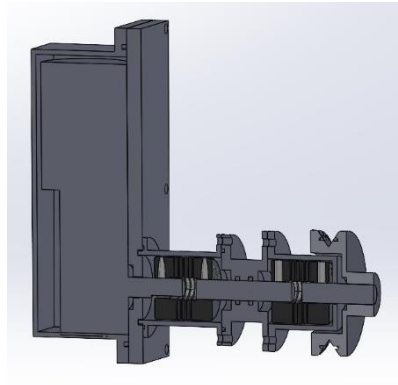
2nd iteration- with right-angle drive motor. This iteration had unnecessary components.
